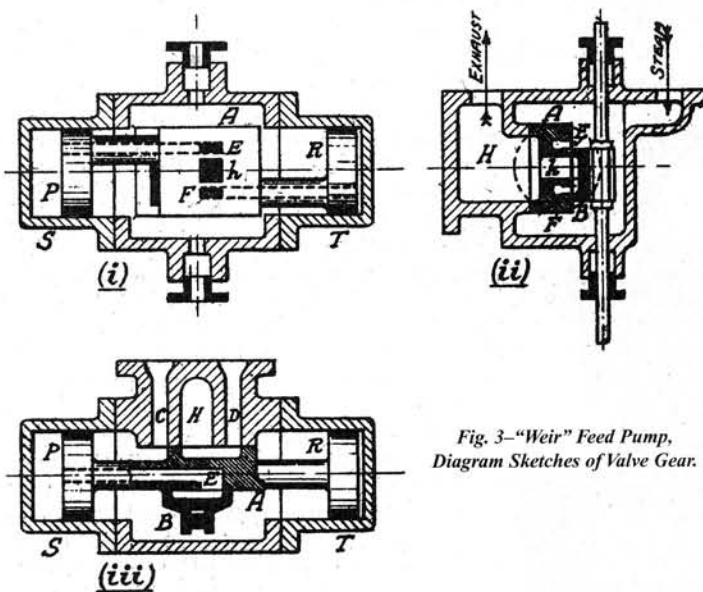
"Weir" Feed Pump, Diagram Sketches of Valve Gear.
